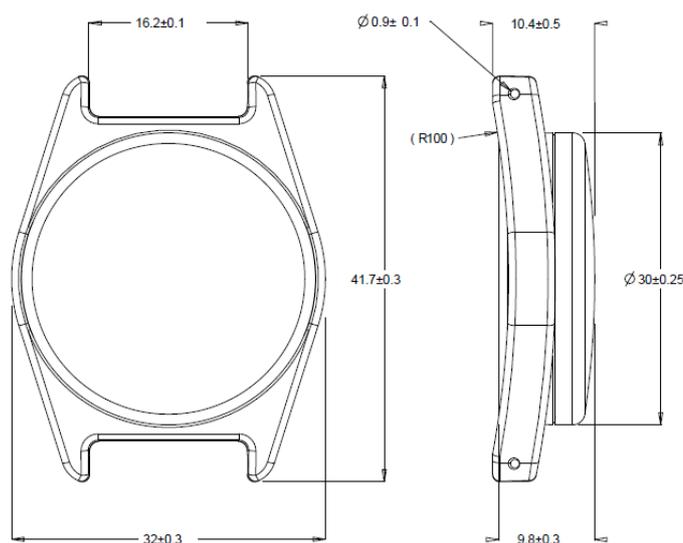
EMBC01 product with wrist-band accessory outline dimensions
